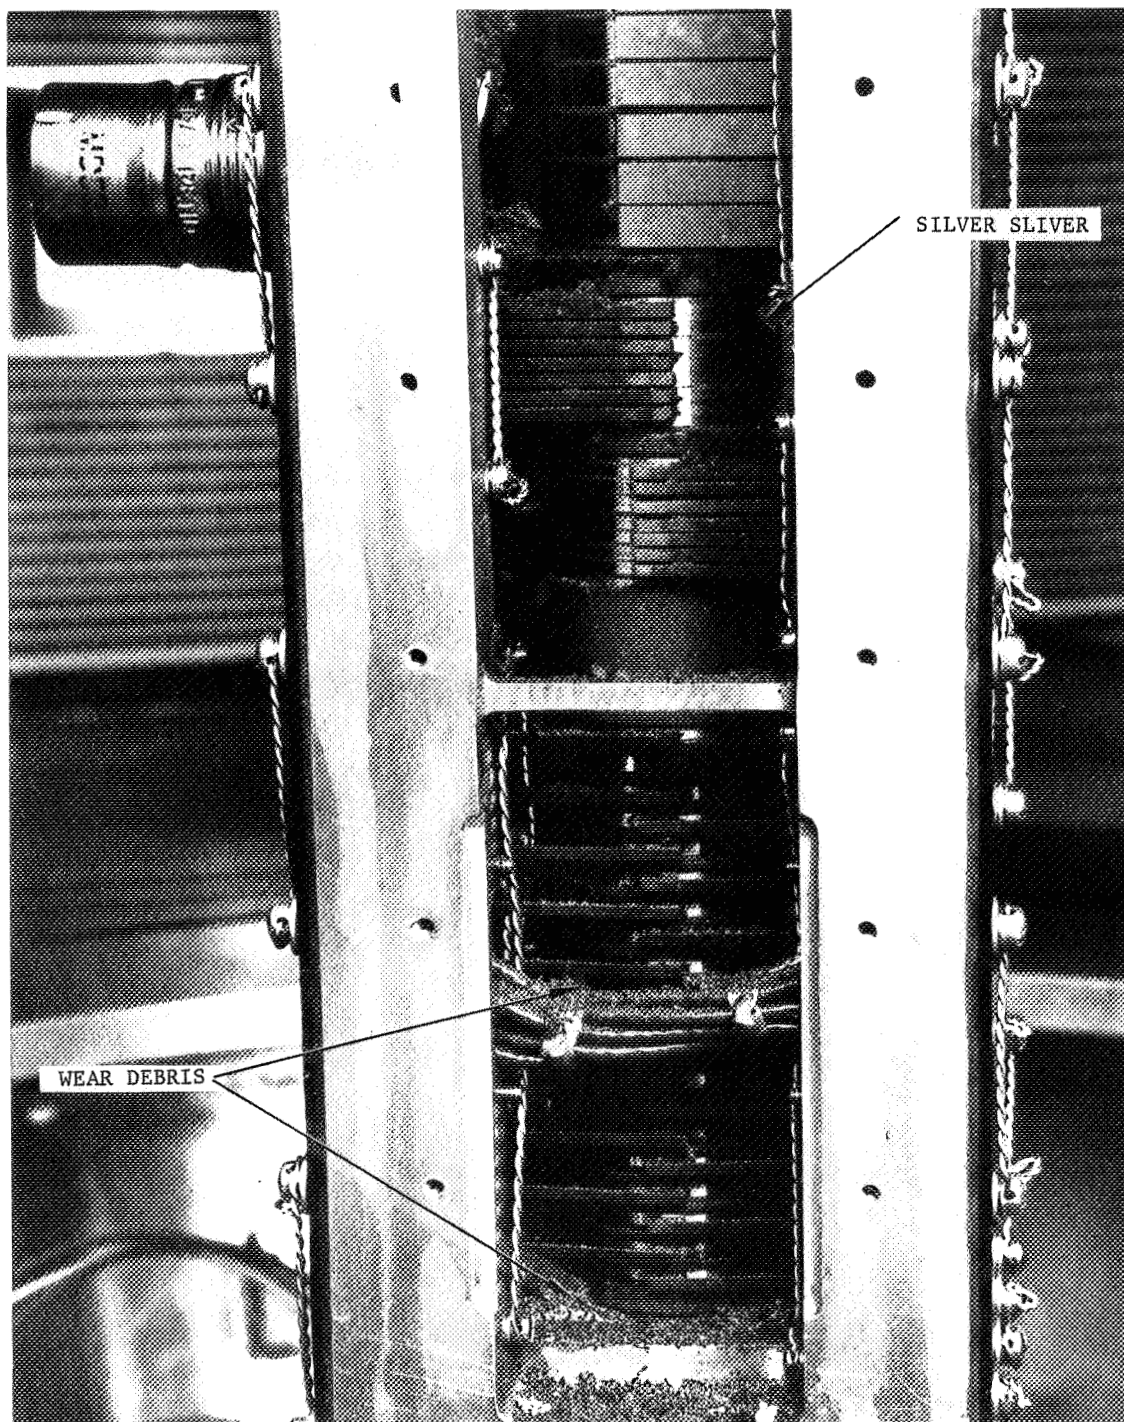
Oil-lubricated slip ring assembly after 6000-h life test
